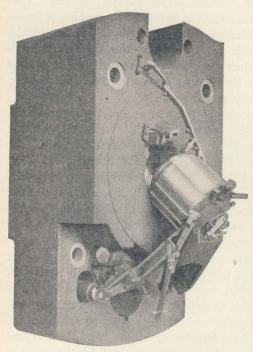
Breech Mechanism for 16-in. Gun, Model of 1919.
